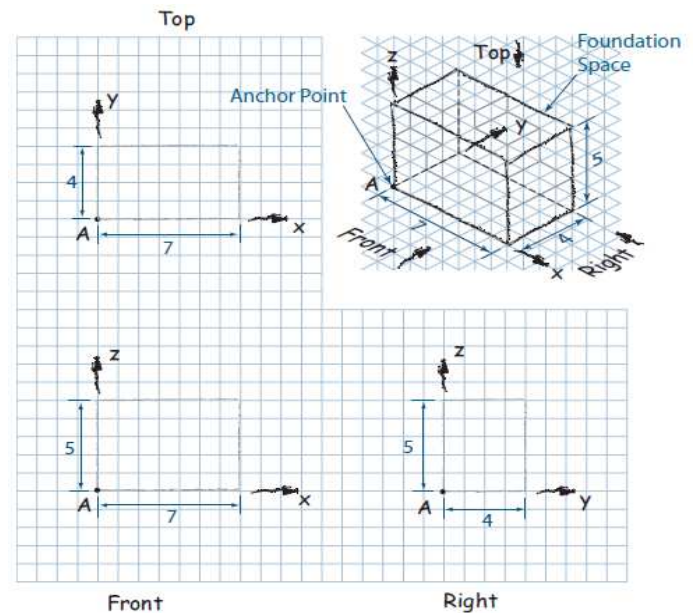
Defining the foundation space, axes, viewing, directions, and anchor point A.
